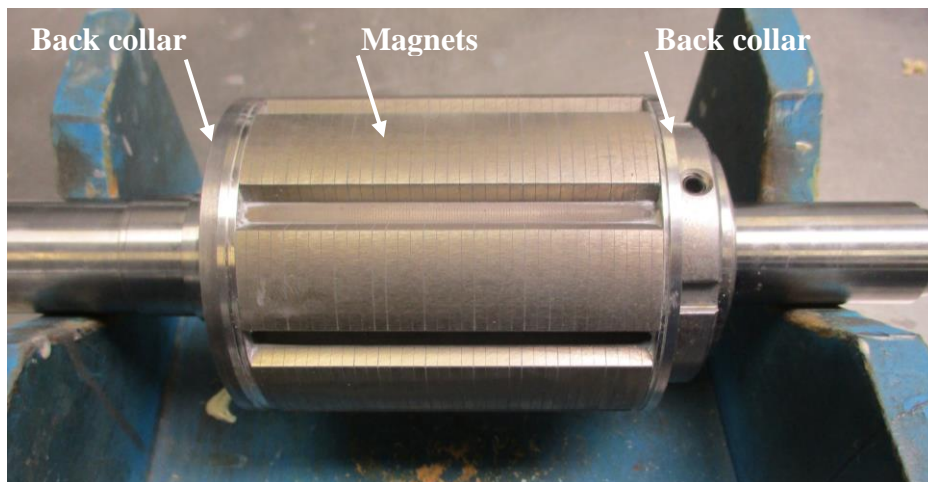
Assembly of the rotor core and collars to the machine shaft
